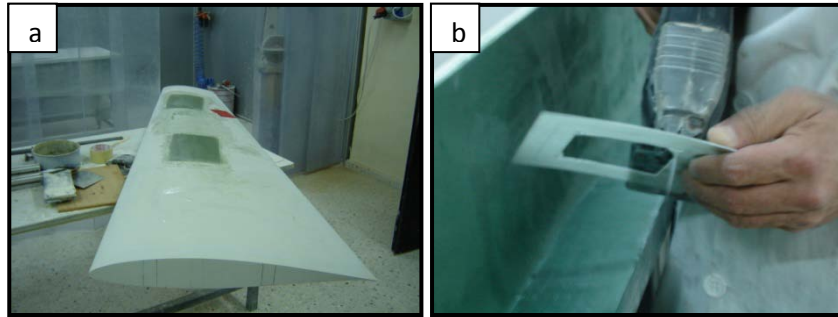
Servo door frames formed over the male mold (a), Frames cut in desired shape (b)
